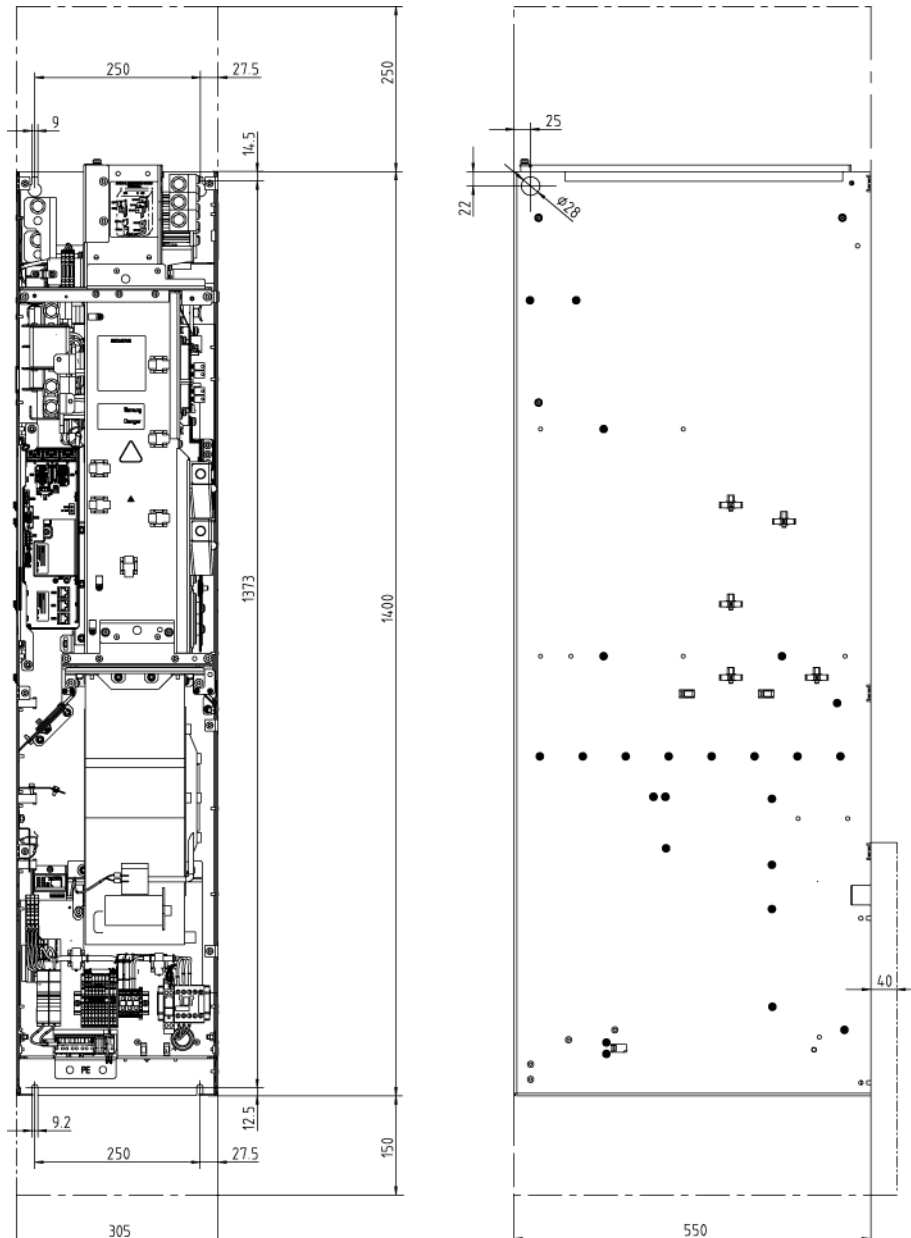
Dimension drawing Smart Line Module, frame size GX Front view, side view
